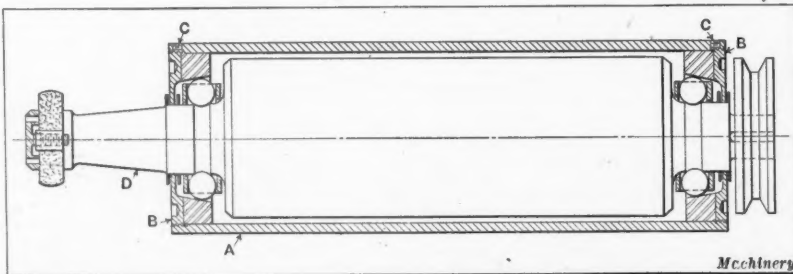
Grinding-wheel Spindle equipped with Ball Bearings
